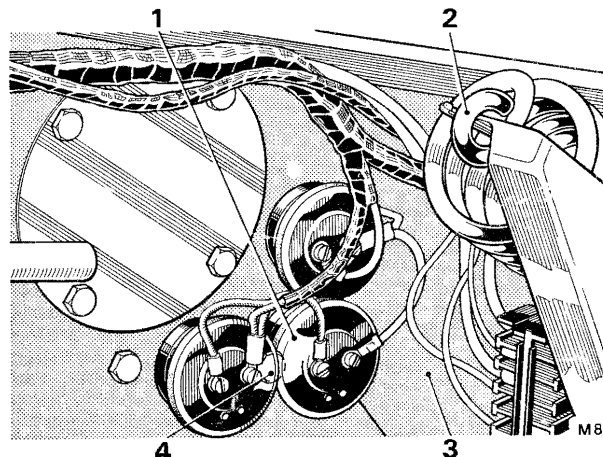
SETSCREWS SECURING CONTROL CANISTER AND ACCESS COVER
